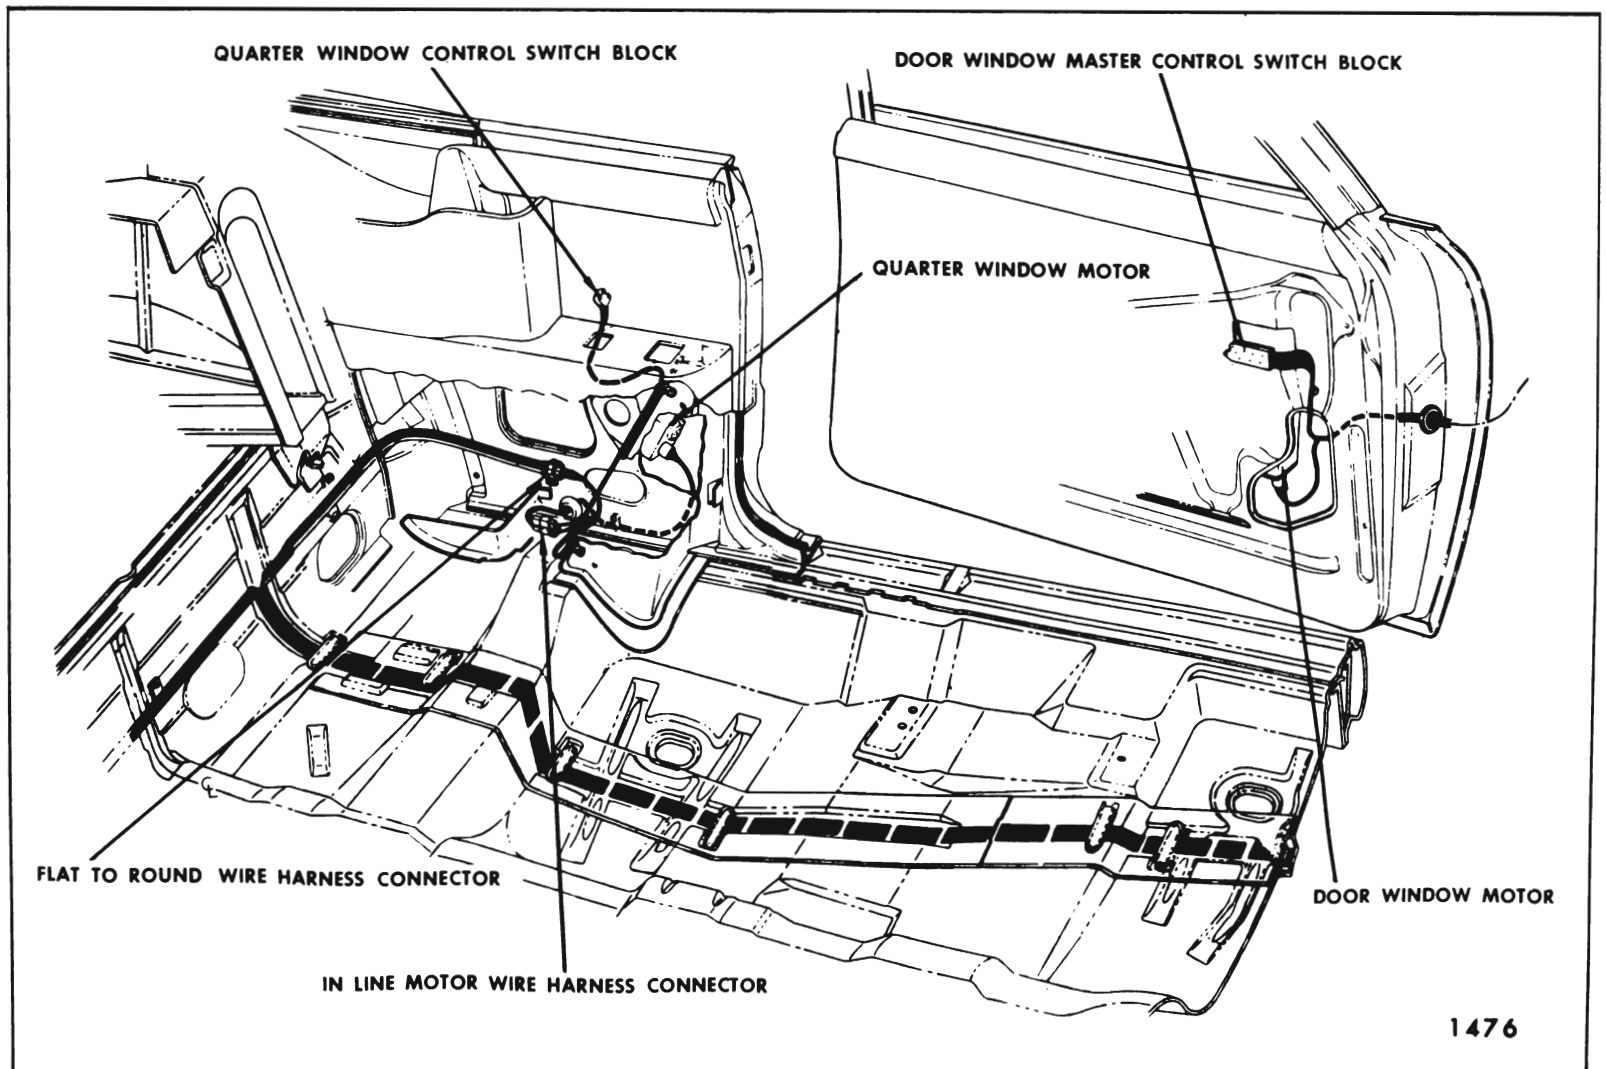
Left Side Power Window Wiring - "A" 67 Styles
